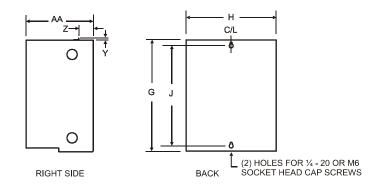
DIMENSIONS OF CC CONFIGURATION
